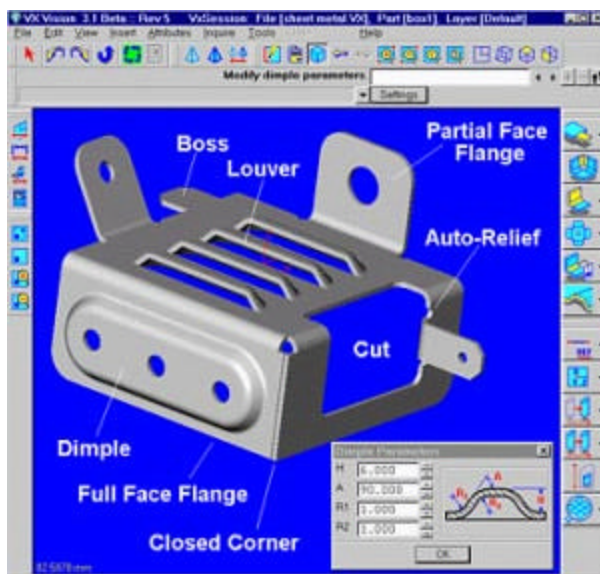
The FabDesign module of VX Overdrive™ is a direct extension of part and assembly modeling. It supports cuts across bends, dimples, louvers, reliefs, full and partial flanges as well as open and closed corners.
